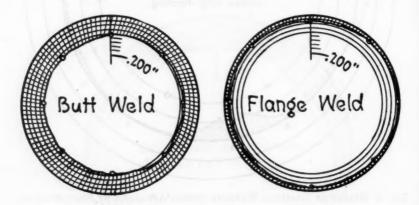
Comparative Deformations in Butt Welds and Flange Welds in 16-Inch by ¼-Inch Pipe
